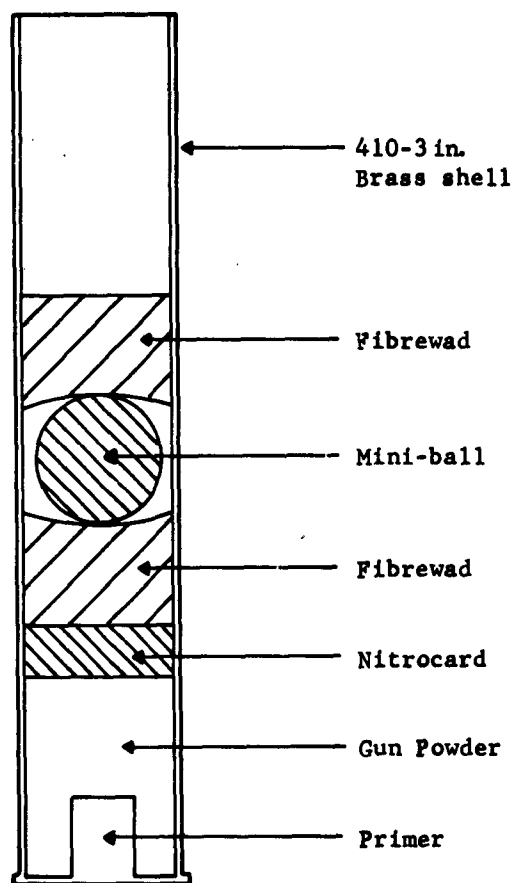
CROSS-SECTION OF LOADED MINI-BALL SHELL
